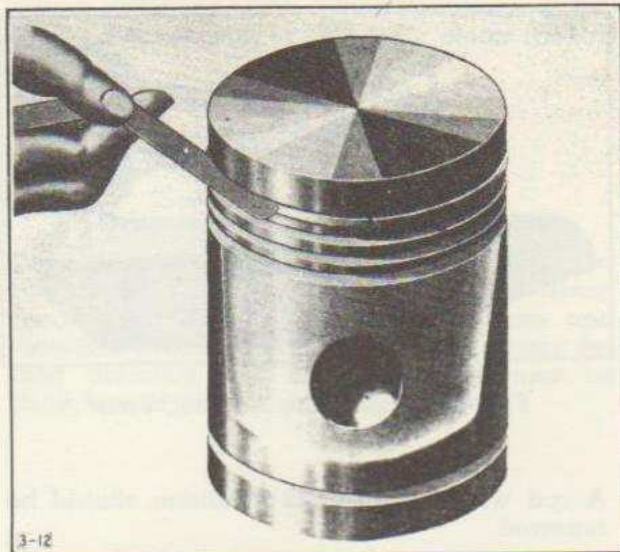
Checking Piston Ring Groove Clearance with Feeler Gage
